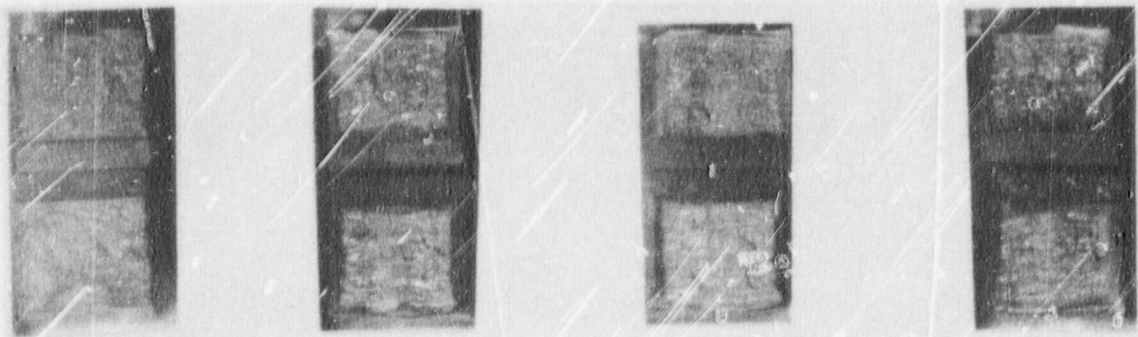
Charpy Impact Specimen Fracture Surfaces for Kewaunee Reactor Vessel Shell Forging 123X167 VA1 (Tangential Orientation)
